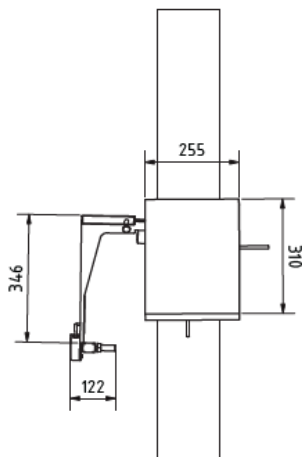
FRONT VIEW (DIMENSIONS MM (NTS))
